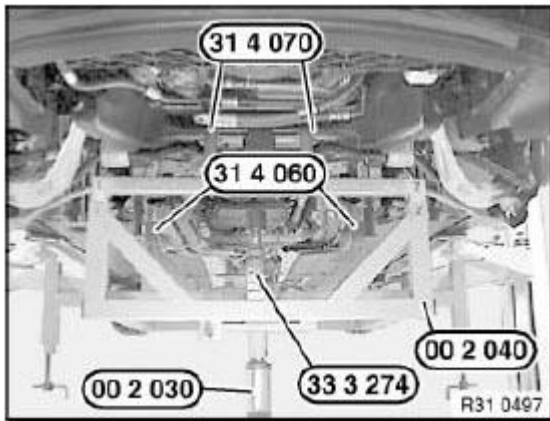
Identifying Special Tool (31 4 070), (31 4 060) And (33 3 274)
